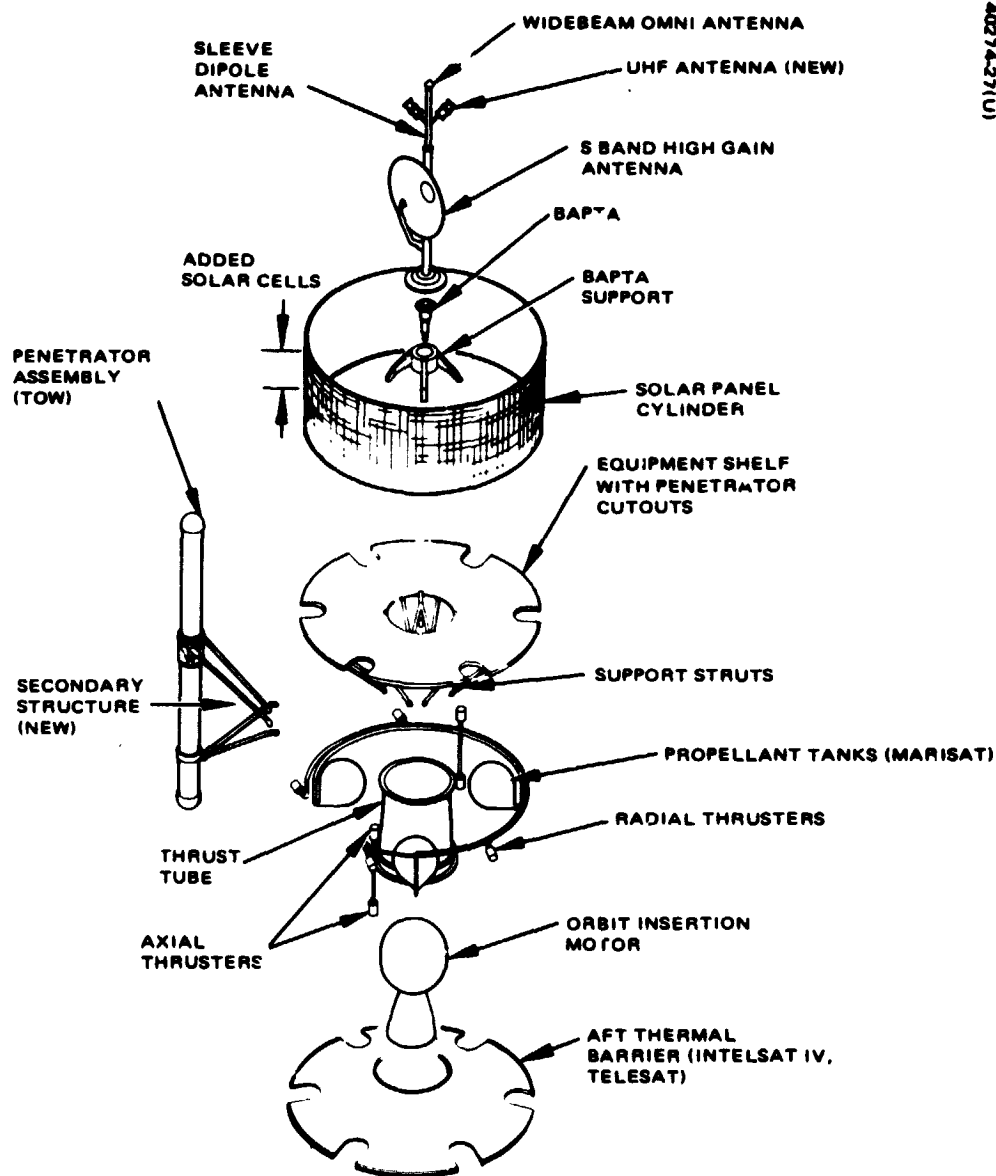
EXPLODED VIEW OF PMO WITH PENETRATORS
